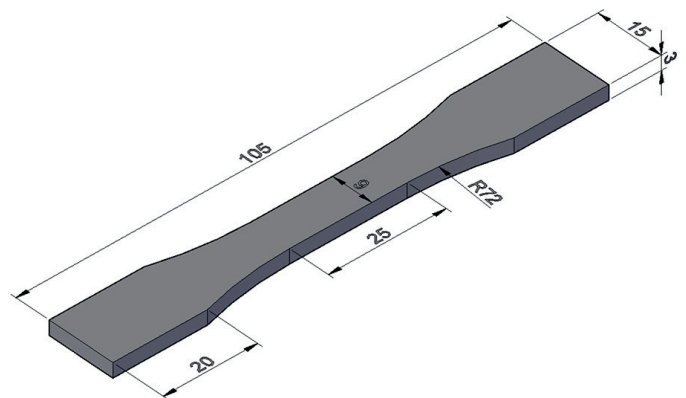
Specimen dimensions based on the ASTM E466-96 standard
